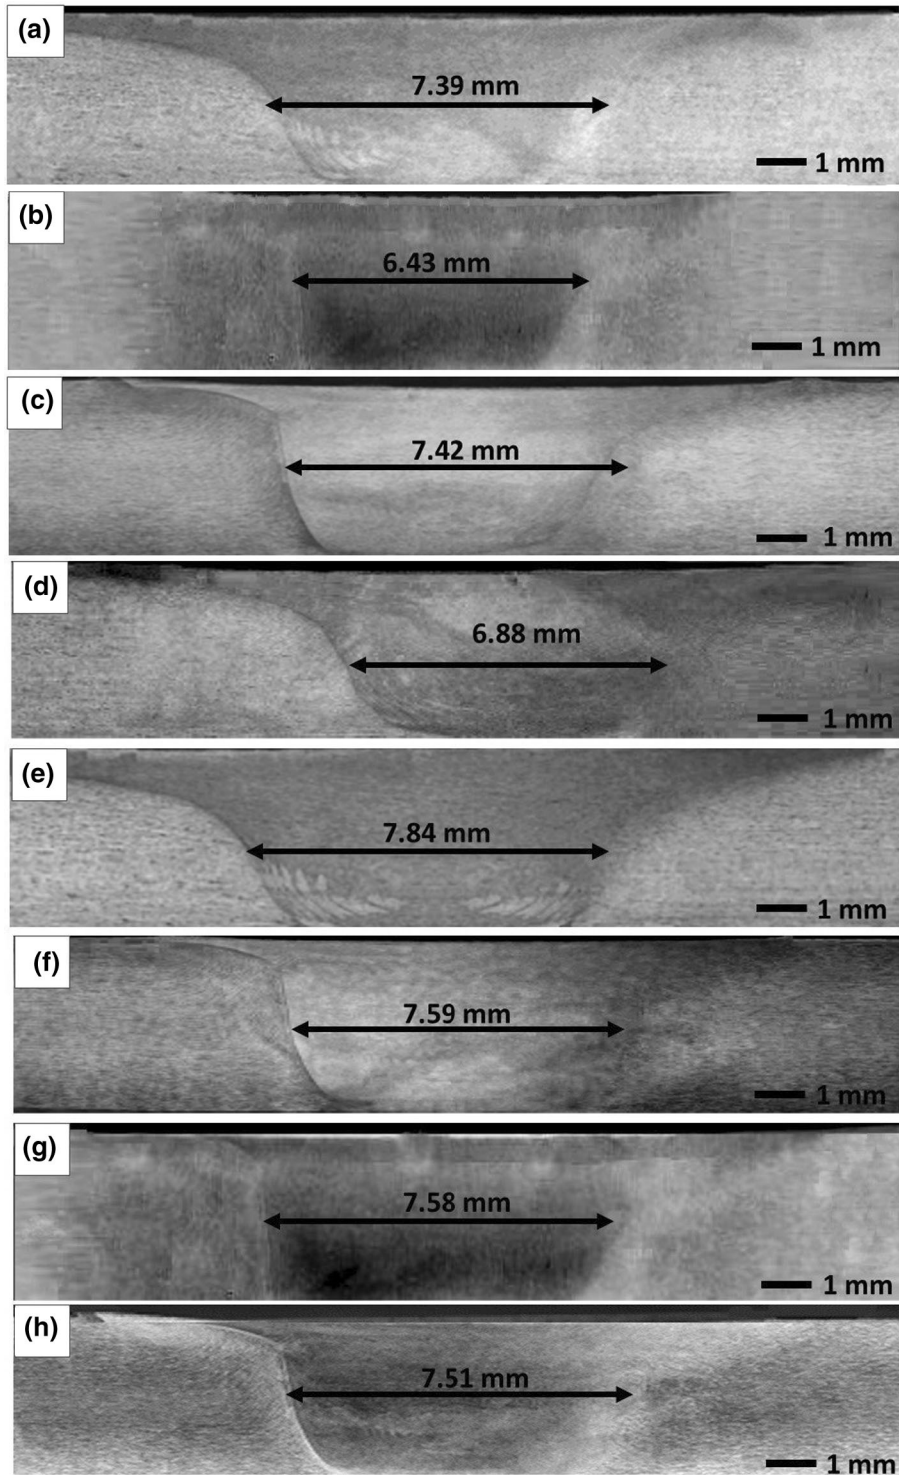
Macrostructure of the produced welds—FSW1 (a), FSW2 (b), FSW3 (c), FSW4 (d), FSW5 (e), FSW6 (f), FSW7 (g) and FSW8 (h).
